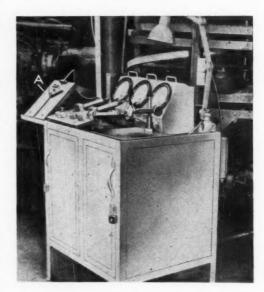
This Bench-mounted Equipment is Installed for Carrying Out Periodical Checks on Cups, for Size, Lobing, Tri-lobe Form, and Taper
